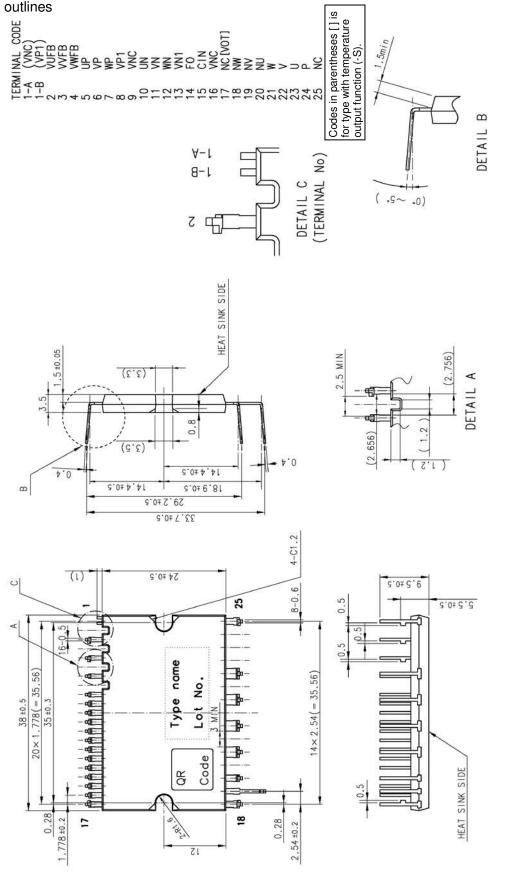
Short pin type package (-S/-ST) outline drawing
